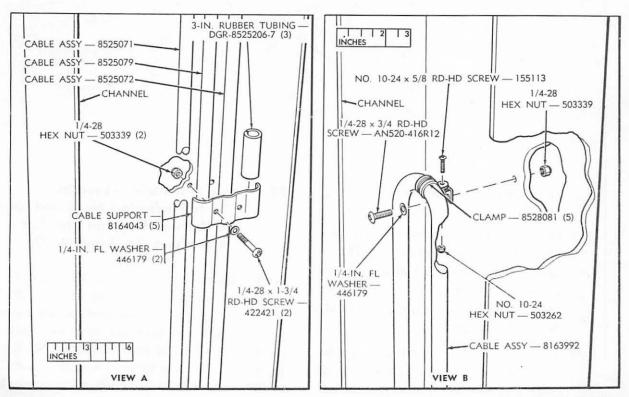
Launching section cable assemblies - removal and installation - Continued.
